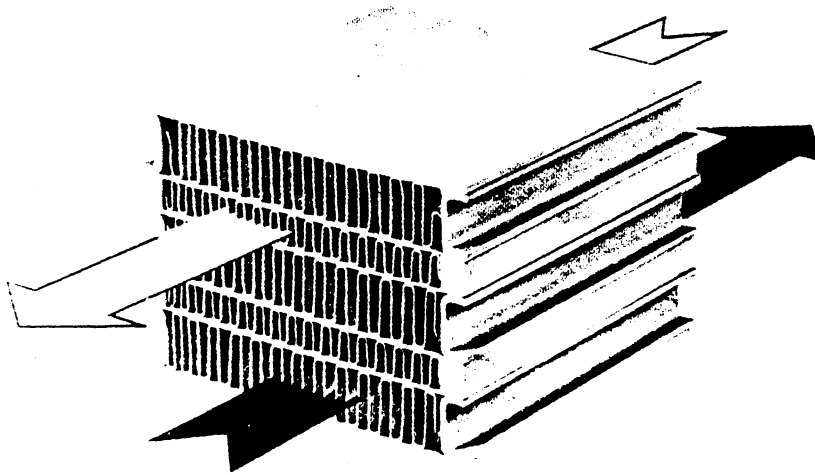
Construction details of a typical single-element plate-fin heat exchanger [26].
